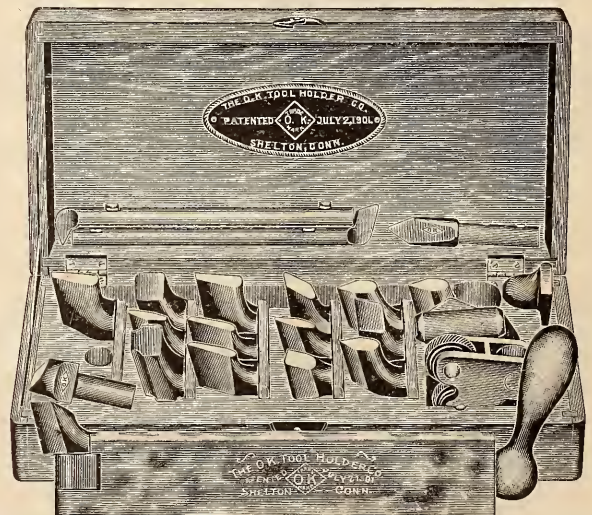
COMPLETE SET OF TOOLS WITH "O. K." TOOL HOLDER.
